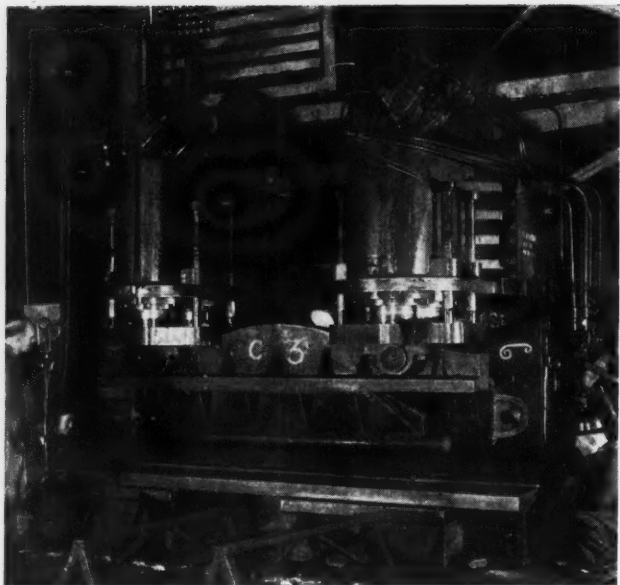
Hydraulic Forming Press Used to Bend and Form Ship Plate
